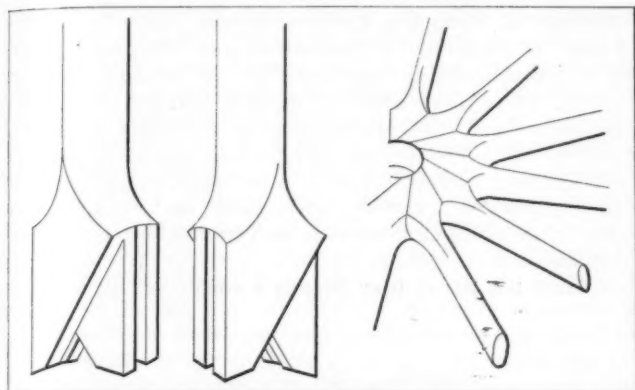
In the Schwarz wheel the miter joints are made using a dovetail and tenon
